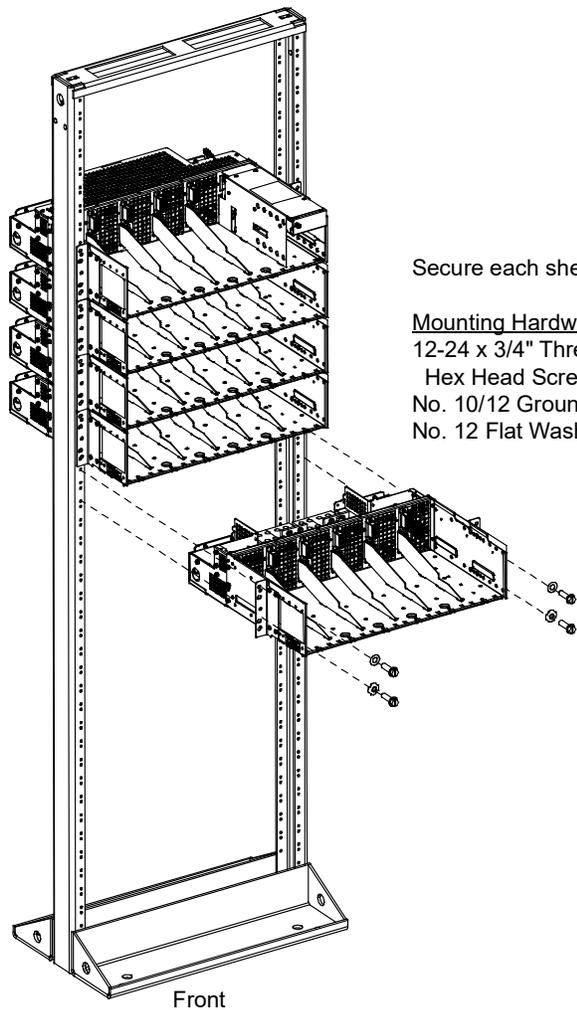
Rectifier Module Mounting Shelf Mounting
